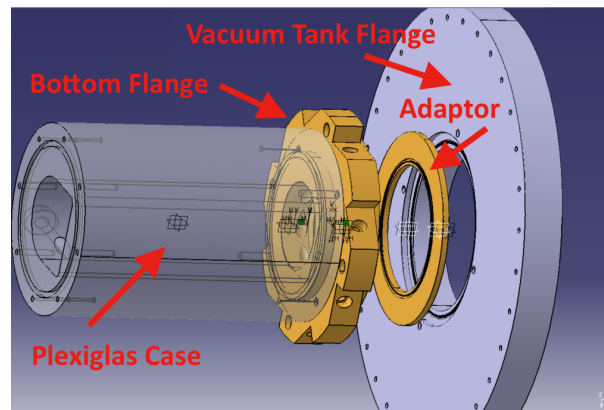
Assembly of bottom flange, adaptor, and vacuum chamber.
